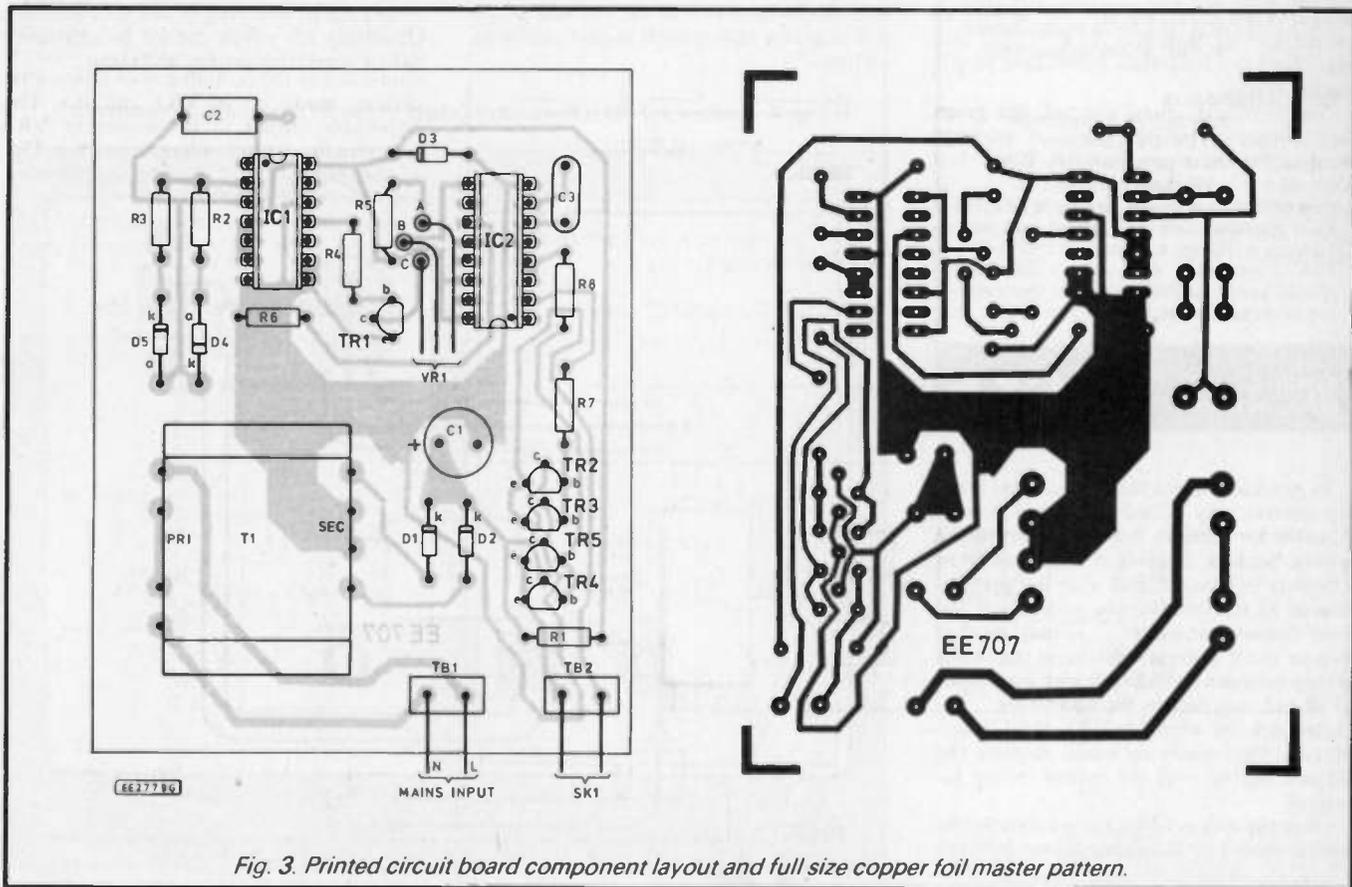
Printed circuit board component layout and full size copper foil master pattern.
